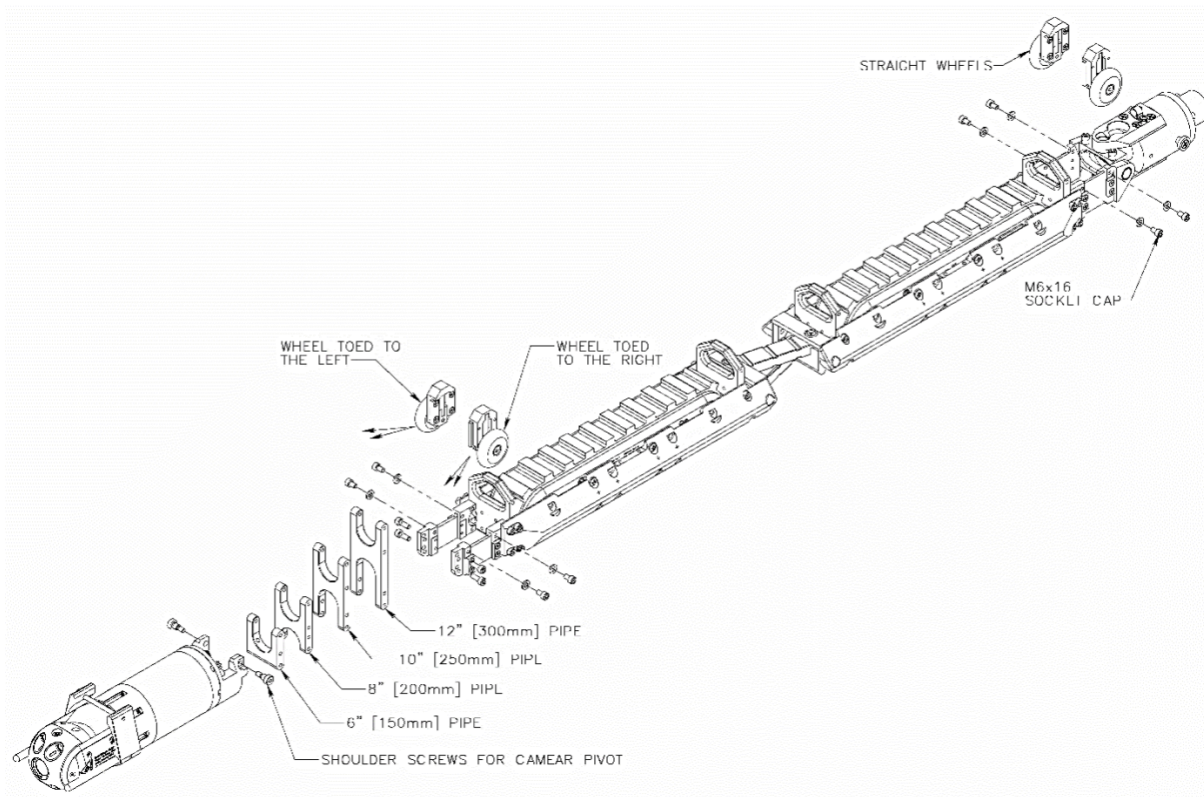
CAMERA HEIGHT / GUIDE WHEEL ADJUSTMENT
